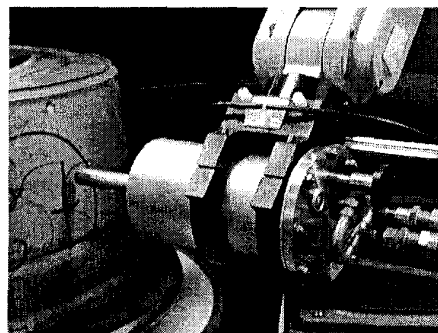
Photograph of the SQUID head of the wheel testing system. While the aircraft wheel rim is rotating, the Joule-Thomson cold head with the SQUID at the tip is moved down the wheel's contour by the robot.
